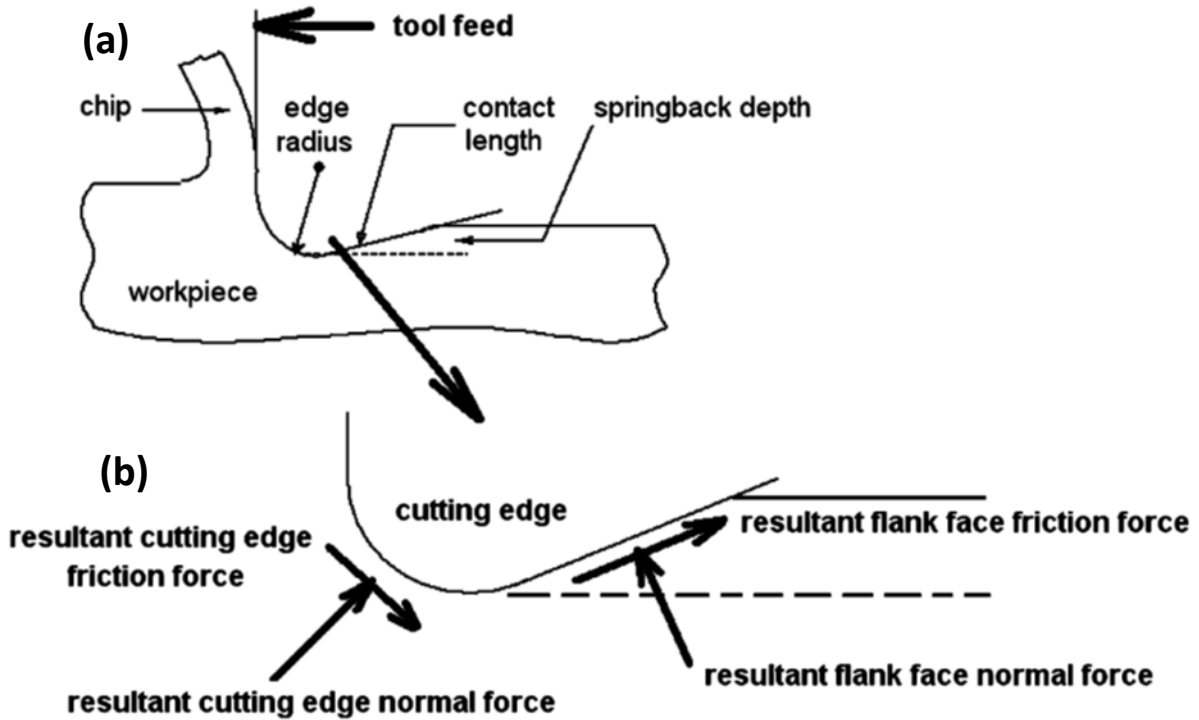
Effects of springback, tool cutting edge and flank on the magnitude and directions of the resultant forces (a) bigger view and (b) magnified view of the cutting edge region (Friedrich and Kulkarni 2004).
